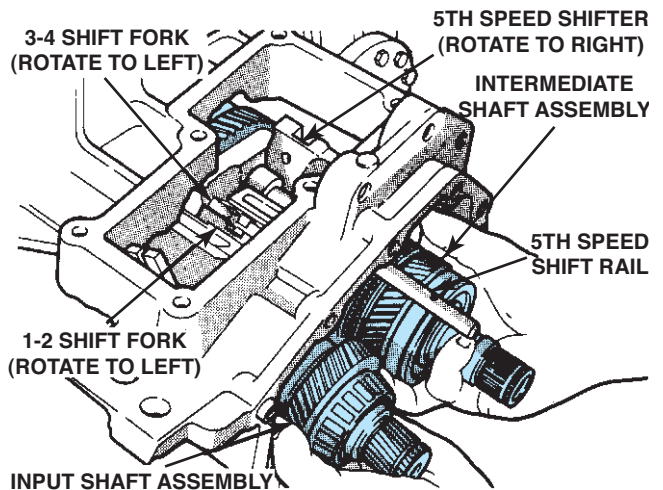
With the shift linkage disconnected, both shafts with gear assemblies can be removed. (Courtesy of DaimlerChrysler Corporation)
